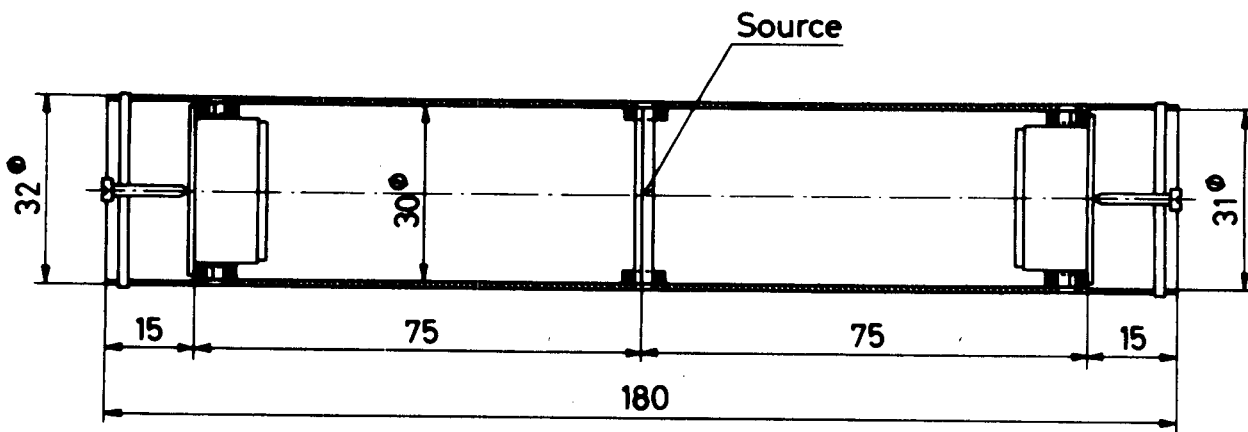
Cut in the counting chamber showing the mounting of detectors and source.
